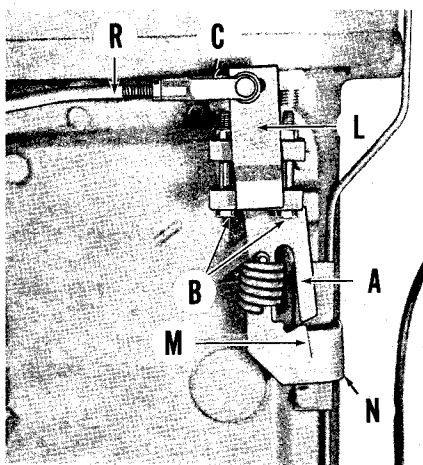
View of Model 8700, 9700, TW-10, TW-20 and TW-30 parking brake linkage. Refer to text for adjustment.
